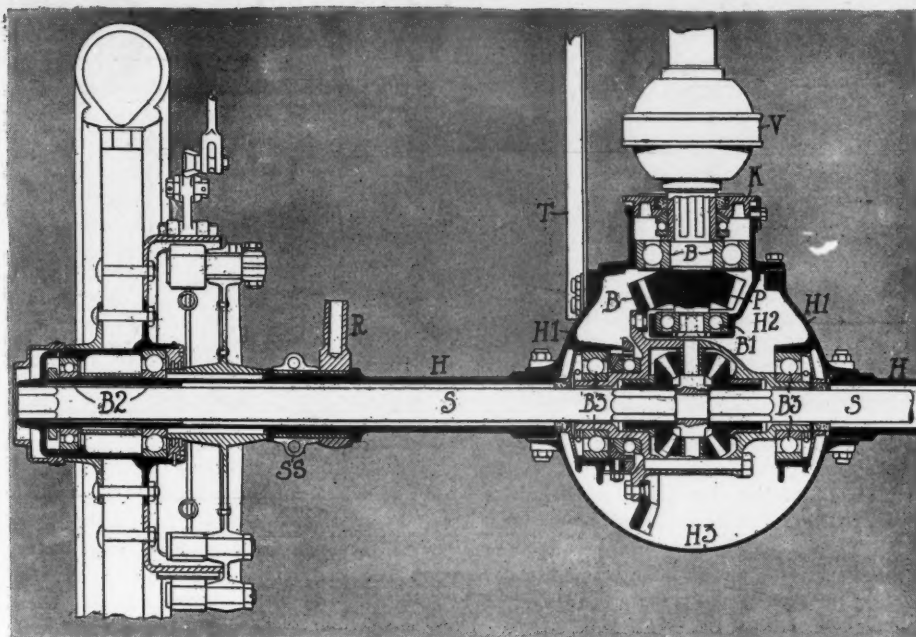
ALCO REAR AXLE WITH FORGED HOUSING
